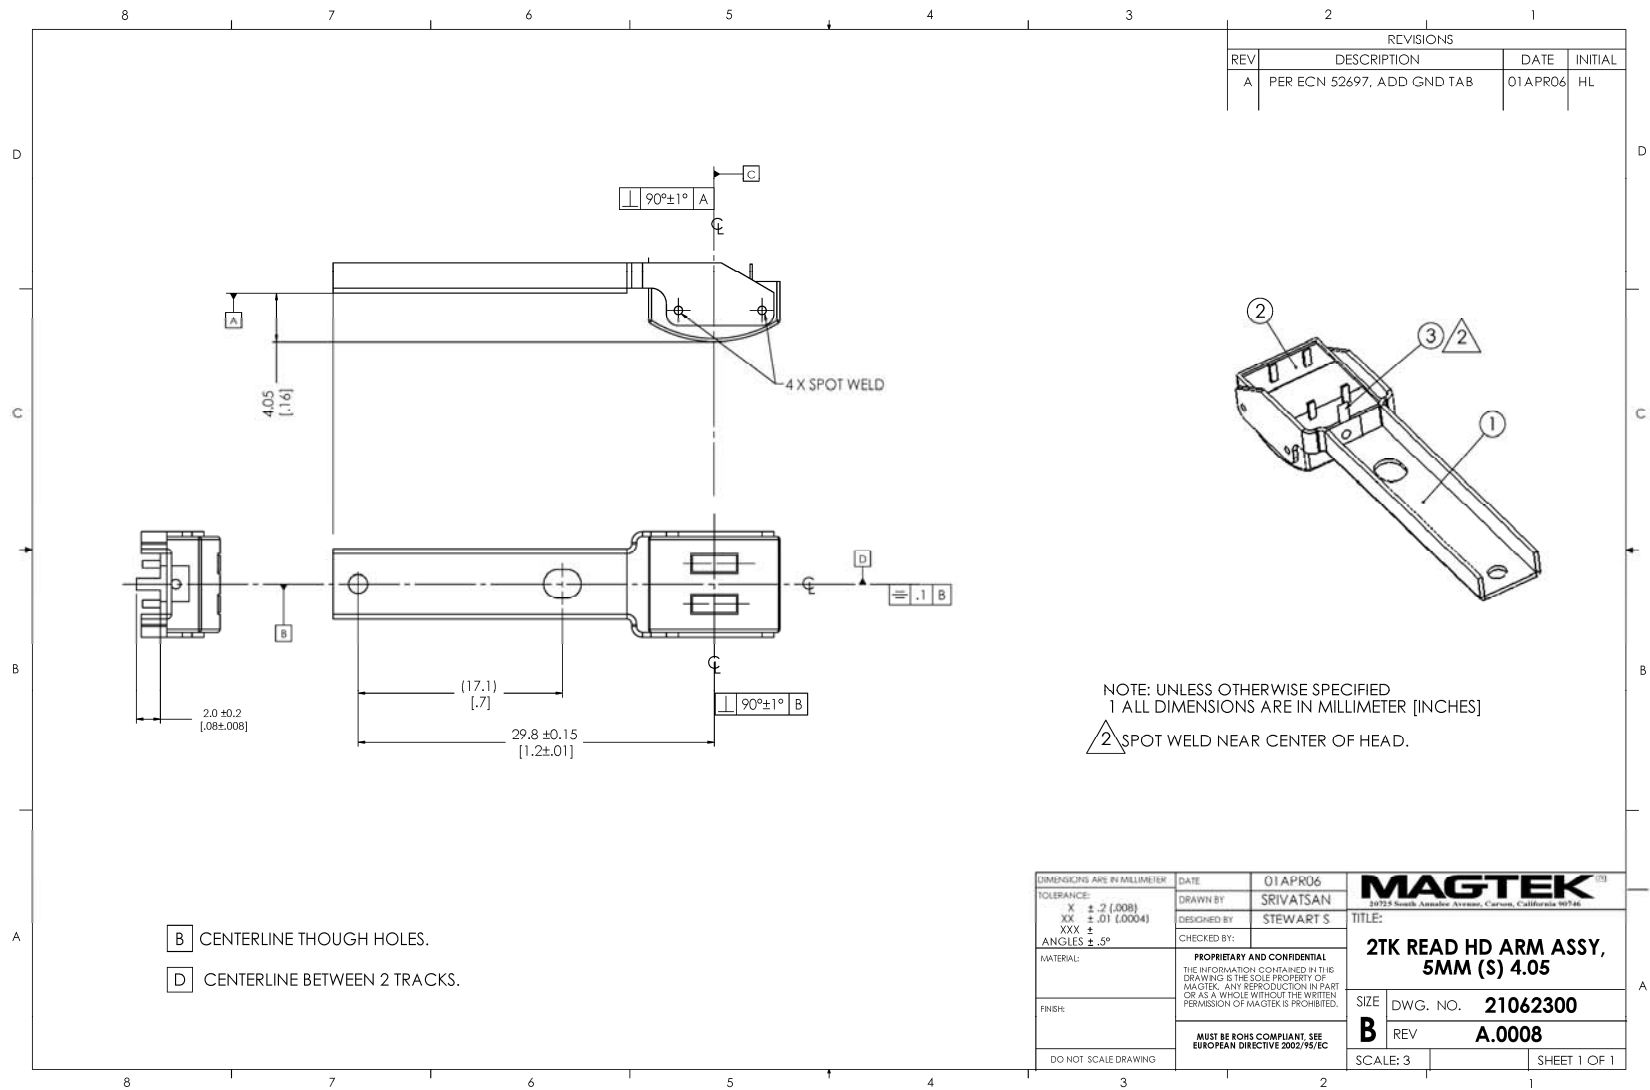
2-Track Read Head on Low Profile Beam Arm
